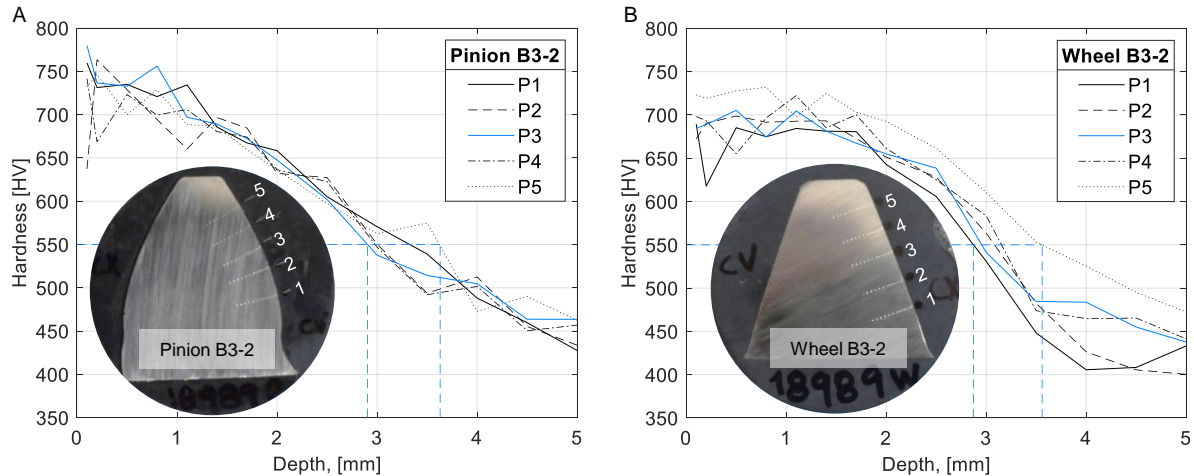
Hardness measurements and hardness map of (A) pinion gear tooth on B3-2 and (B) wheel gear tooth B3-2
